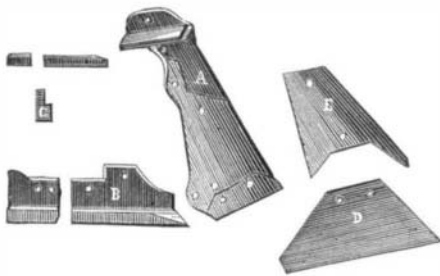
View of the Separate Pieces of the Plow Body, minus the Mould Board.
